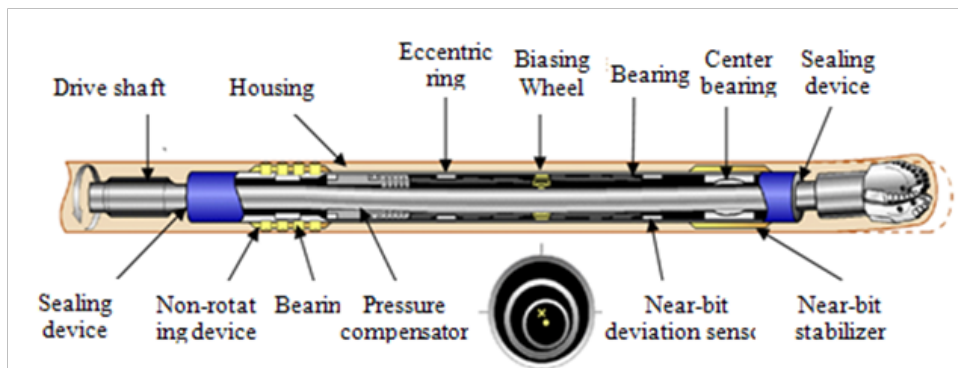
Geo-Pilot Rotary Steering Drilling Tool Working Principle
